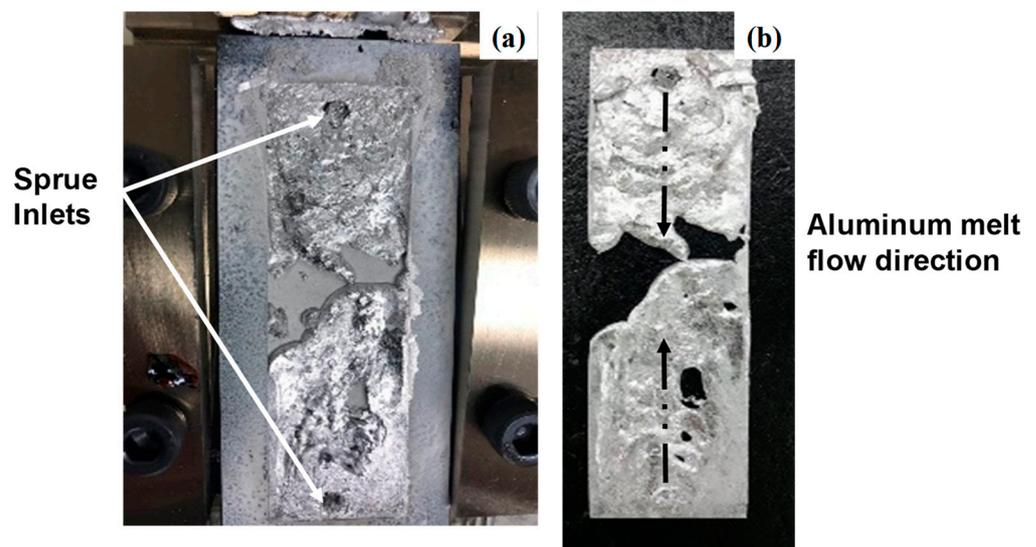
A short-shot experiment by using the double PIG-nozzle units for PIG die-casting. (a) Aluminum melt flow into the rectangular die cavity, (b) solidified aluminum melts.
